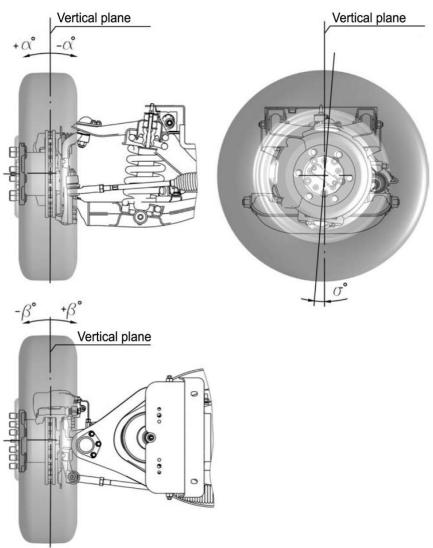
Front wheel alignment angles: α - camber angle; β – wheel toe-in; σ – caster angle
